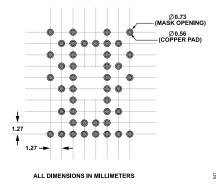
Recommend PCB Pattern, Solder Mask Defined Pads
